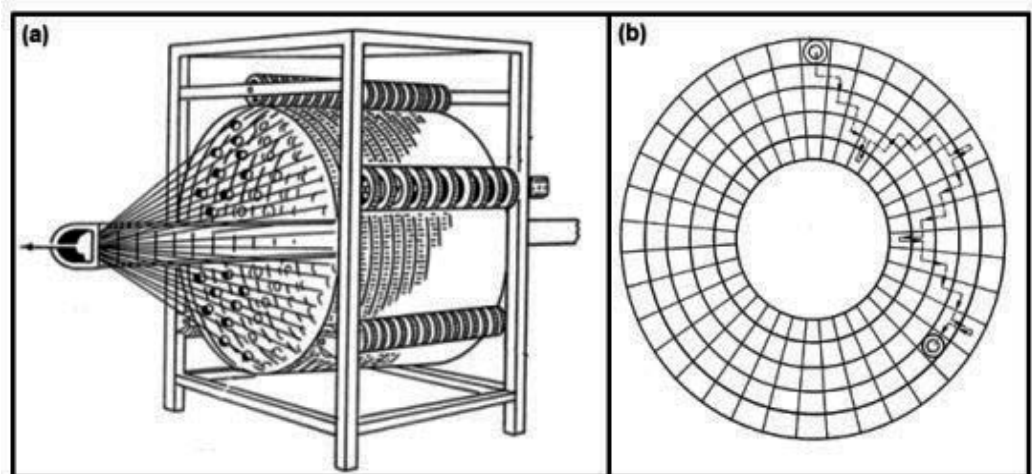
(a) Schematic views of 3D circular braiding machine [90] (b) yarn carrier path [69].
